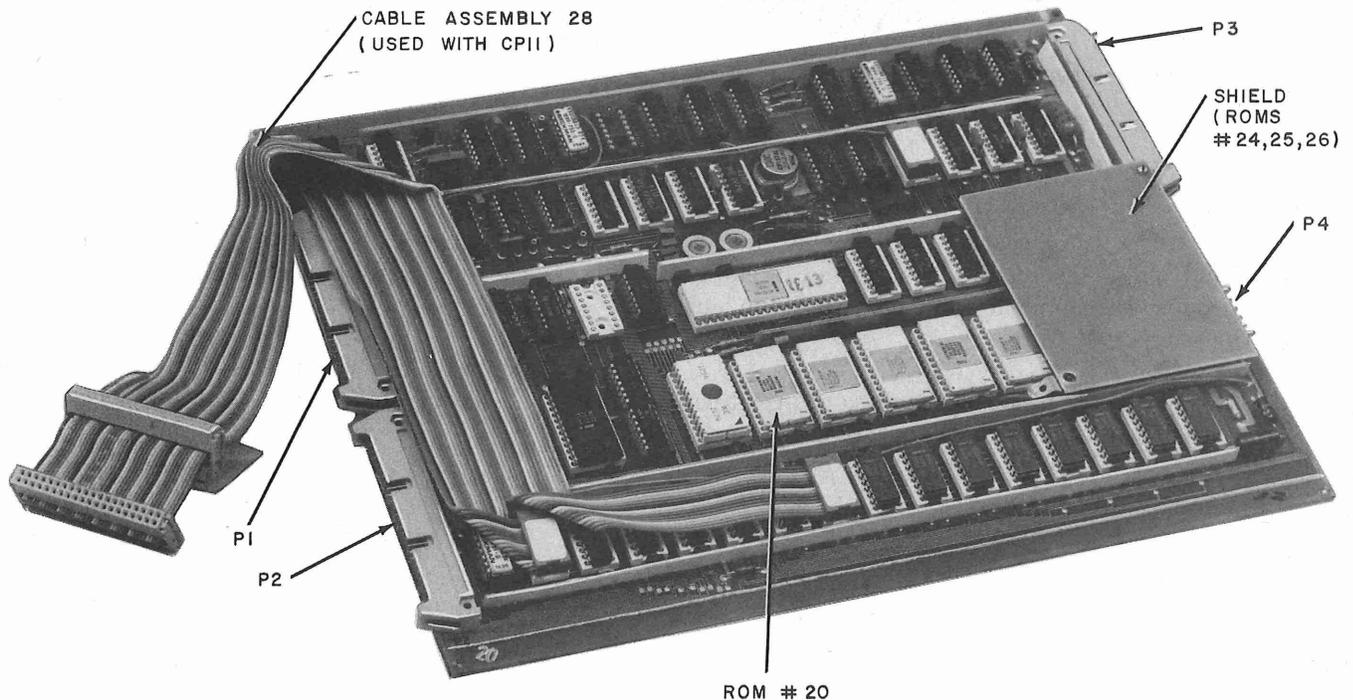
Circuit Pack CP1 Showing Cable Assembly 28 and ROM Shield
